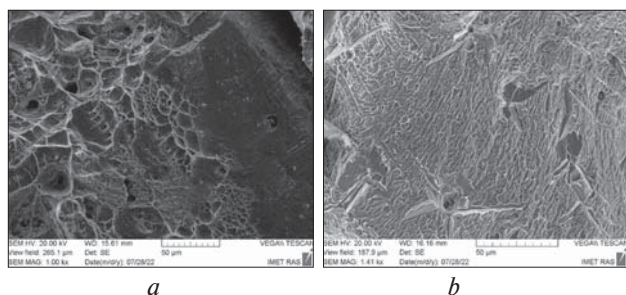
Fractographs of surface fracture for the steel 05Kh21AG15N8MFL: initial state (casting) after quenching (*a*); initial state (casting) after AAT (*b*)
